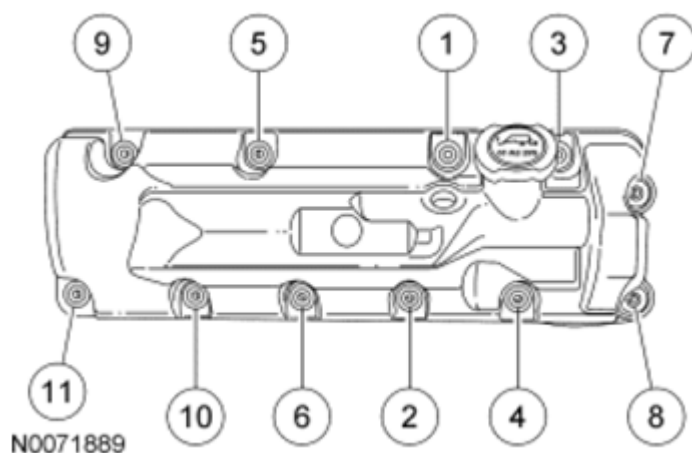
Identifying Valve Cover Fasteners Tightening Sequence
